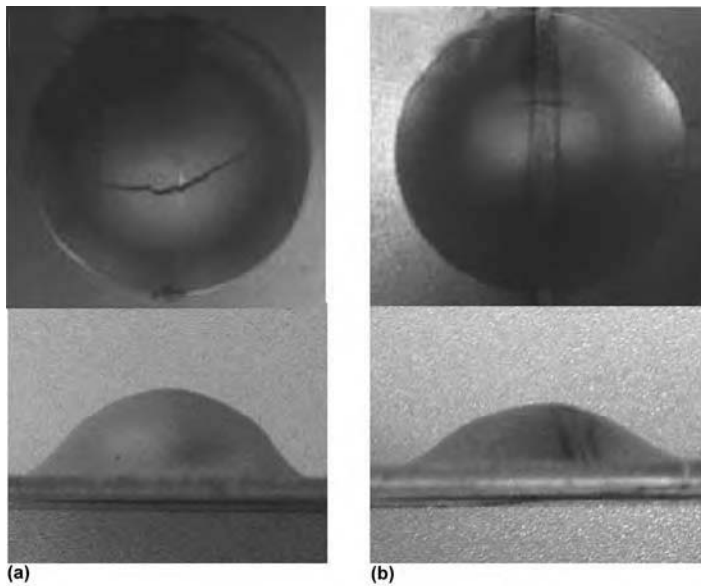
Photographs of Erichsen test specimens for (a) base material and (b) laser-welded seam
